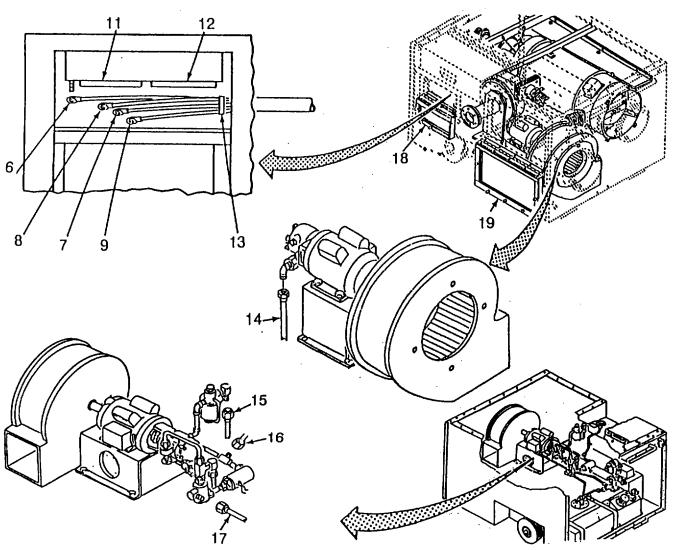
Fuel Pump and Solenoid Valve Installation (Sheet 2 of 2)
